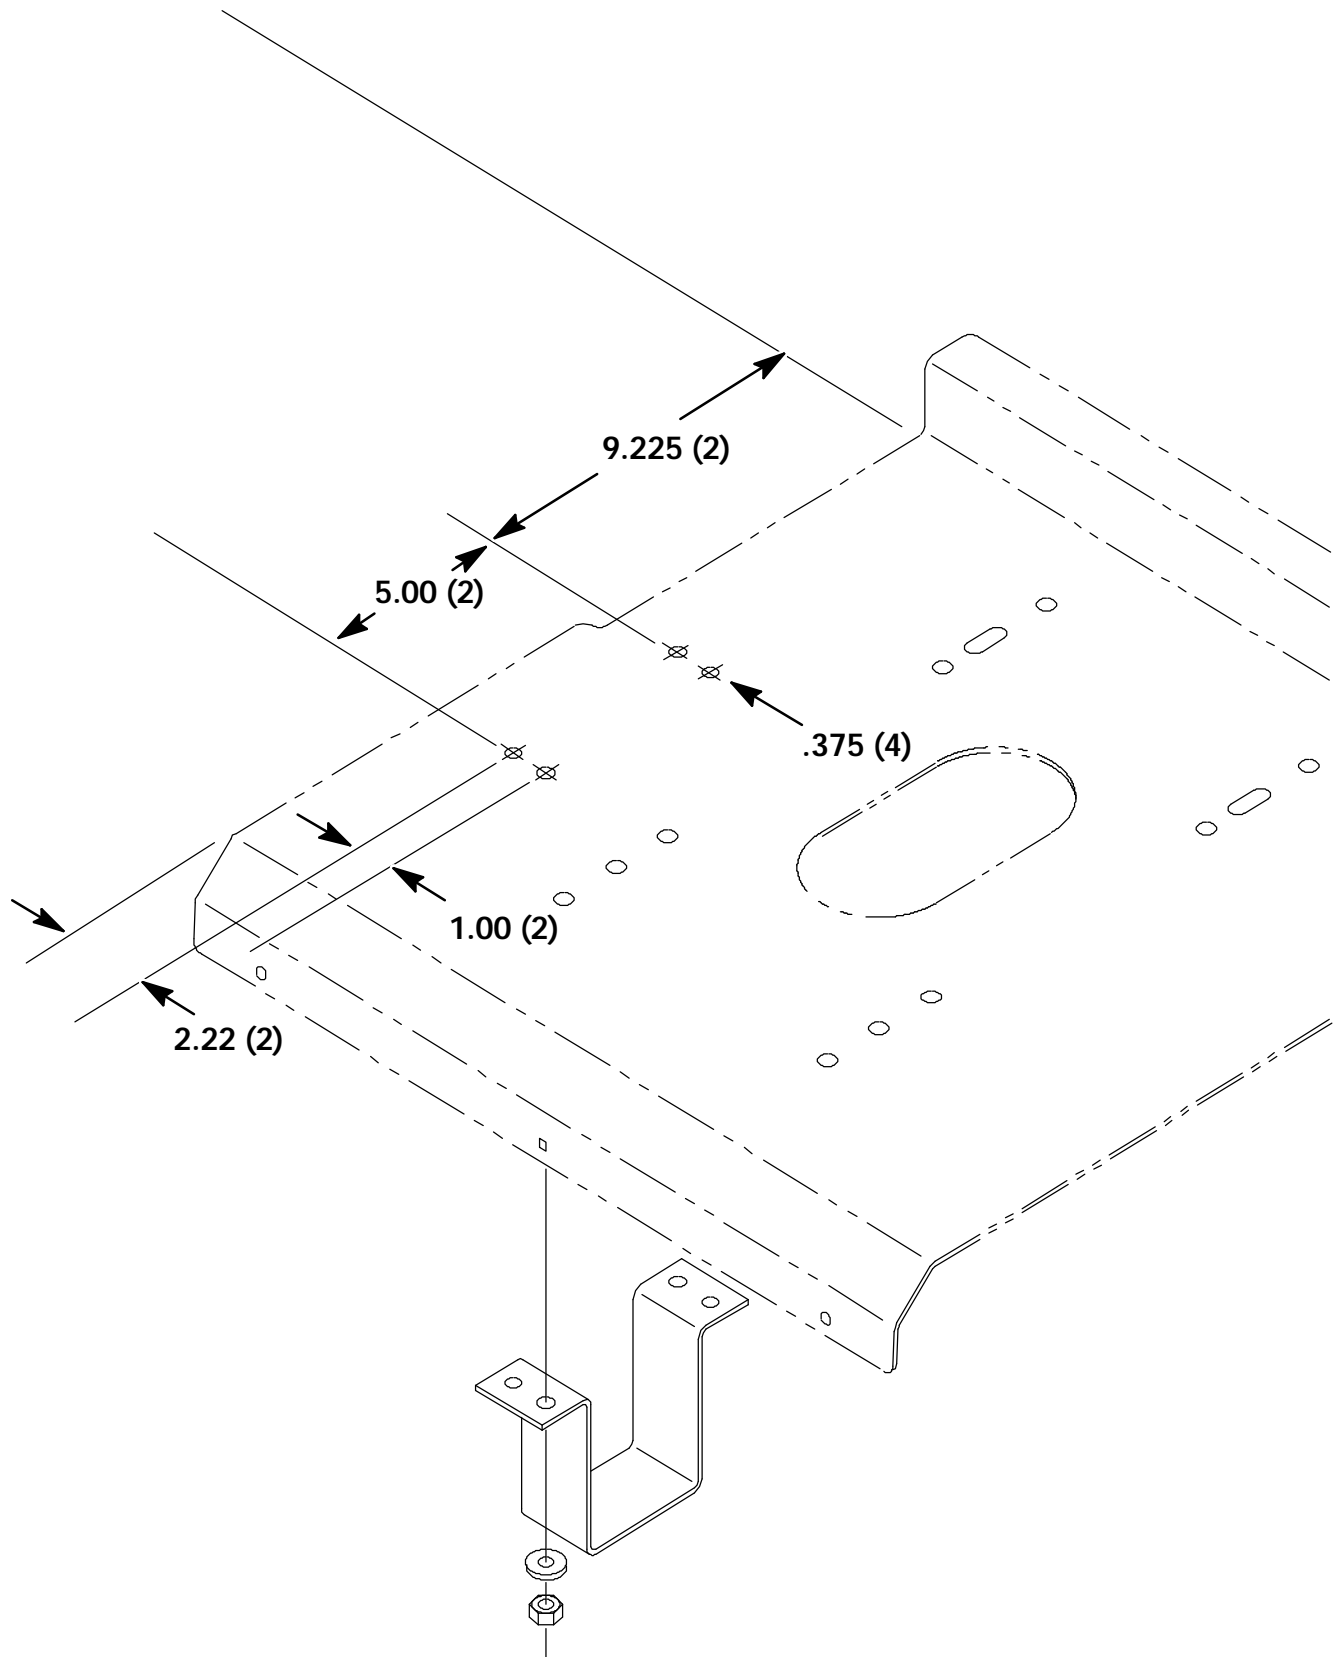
Dimensions for Battery Case Stop Mounting Holes
